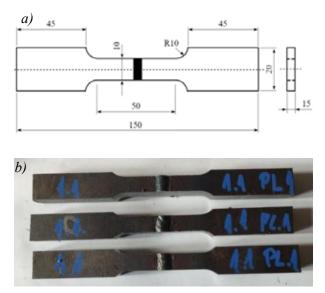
Test tubes for testing the tensile properties of the welded joint
